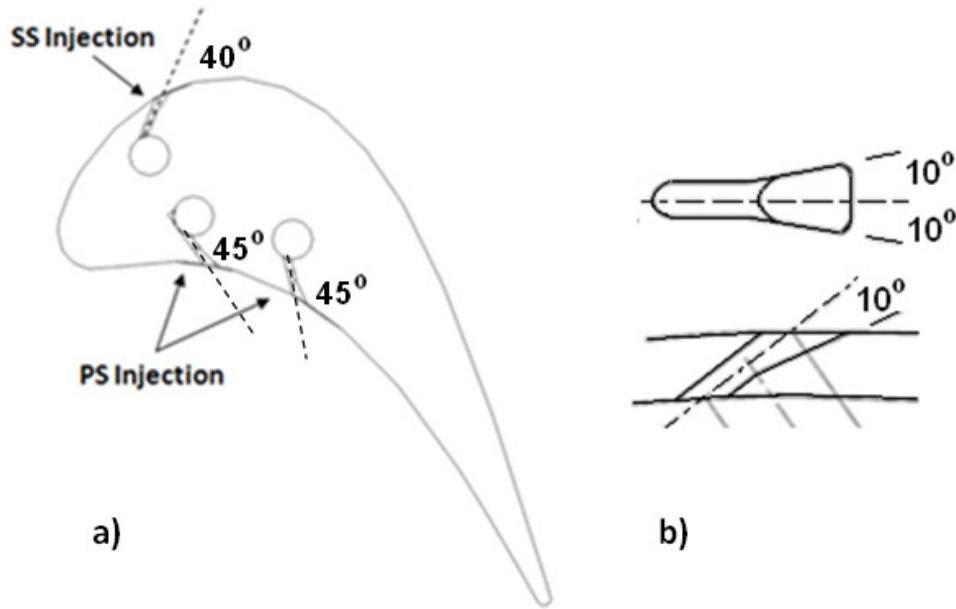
2. a) Film cooled blade profile; b) Fan-shaped hole geometry
